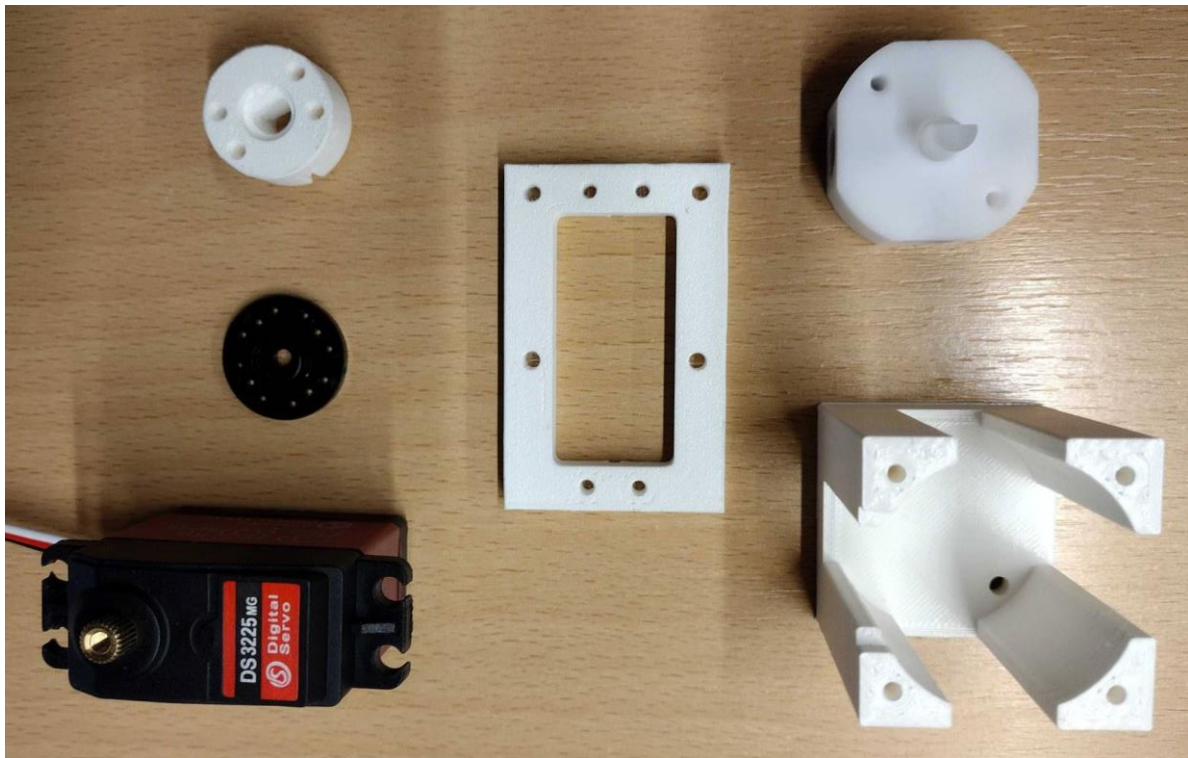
Elements before assembly. The high-pressure valve needs to be screwed in place using M3 bolts – threaded bores visible in the valve body and adequate bores with counterbores are present in the valve holder (element on the bottom right of the photo). The “plastic servo’s axle coupler plate” described in the text is the black round element visible above the servo.
